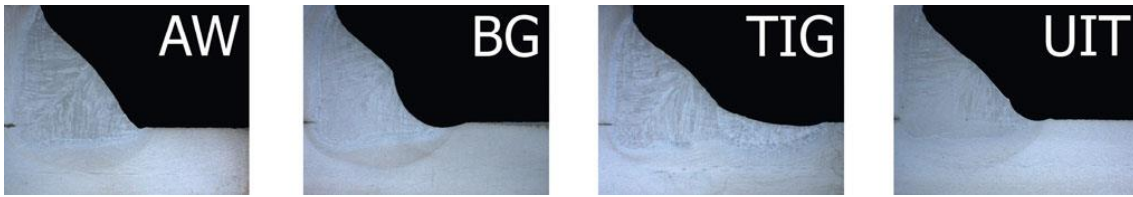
Examples of the weld profiles of as-weld, burr grinding, TIG dressing and UIT (Pedersen et al. [56]).
